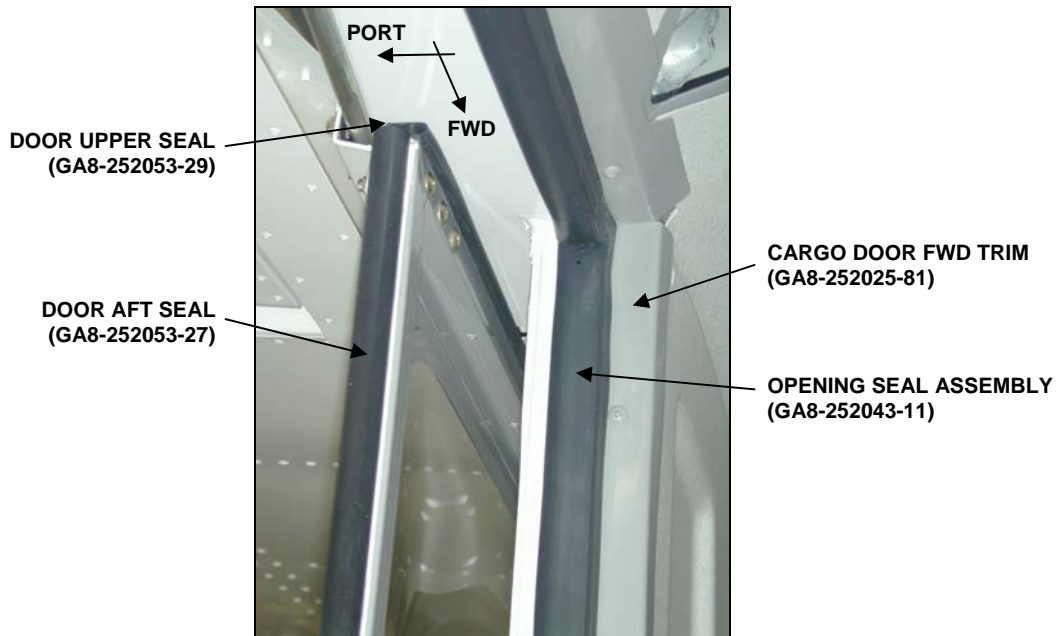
Installation of the new upper and aft cabin door seals and cabin door opening seal assembly.
